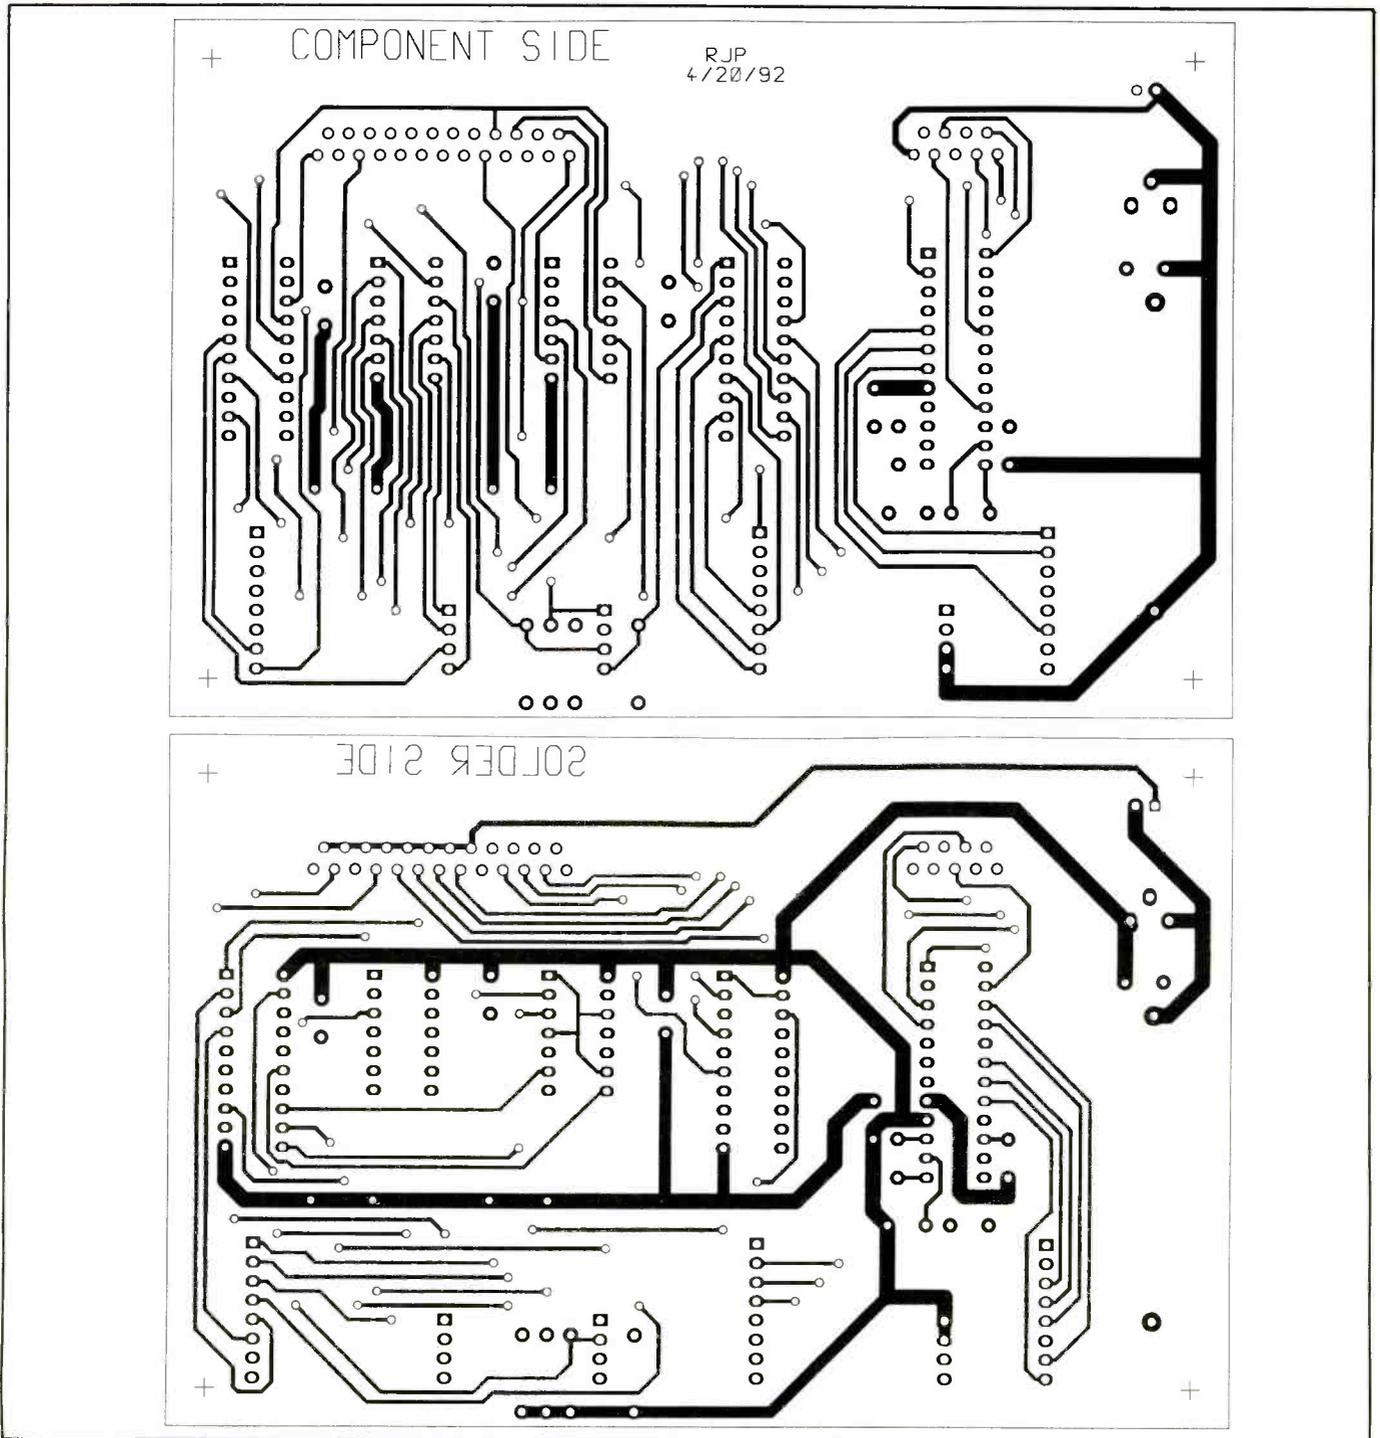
Actual-size etching-and-drilling guides for the component and solder sides of the Interface's double-sided printed-circuit board.
